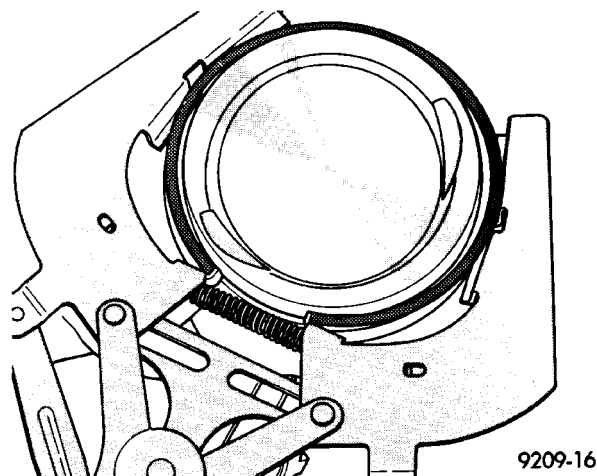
PISTON RINGS - REMOVAL/INSTALLATION INSPECTION
